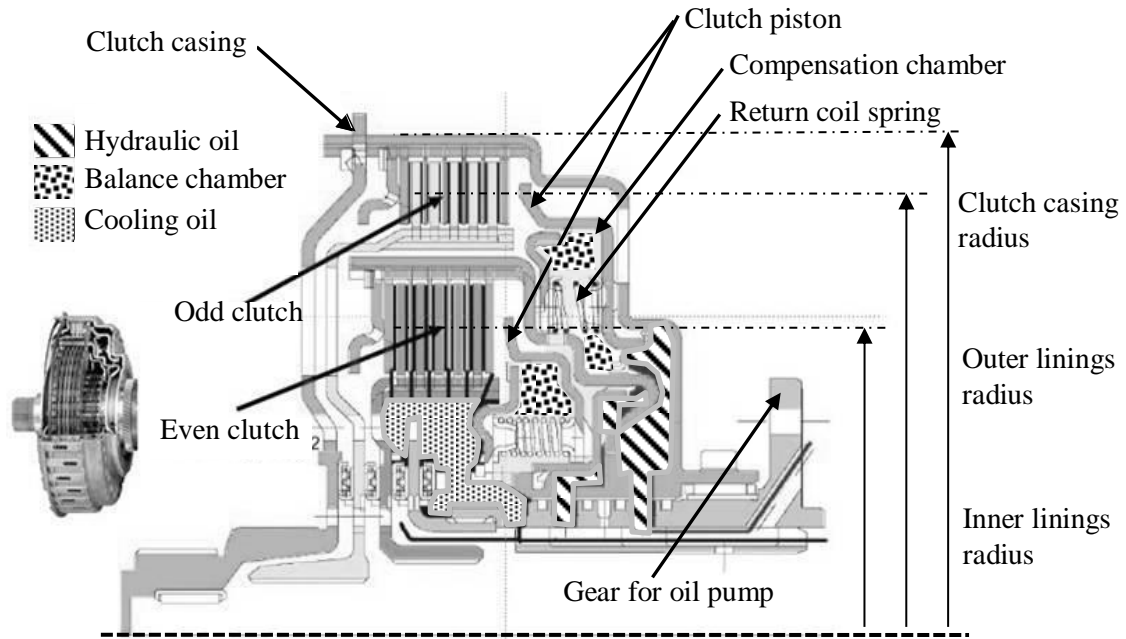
Cutaway drawing of the double clutch of the longitudinal seven-speed wet DCT [118].
